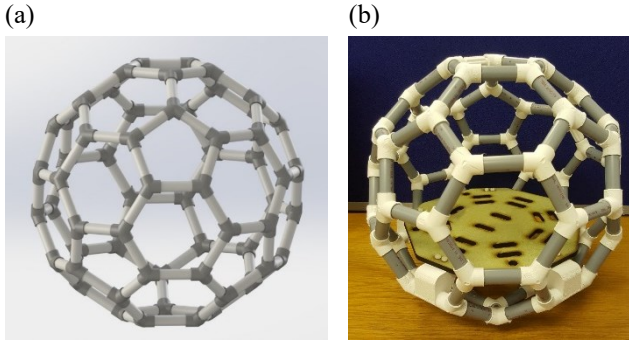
CAD model and built version of the large-scale TOM; (a) design concept and (b) constructed TOM with mounting plate. The TOM is approximately 360 mm in diameter.
